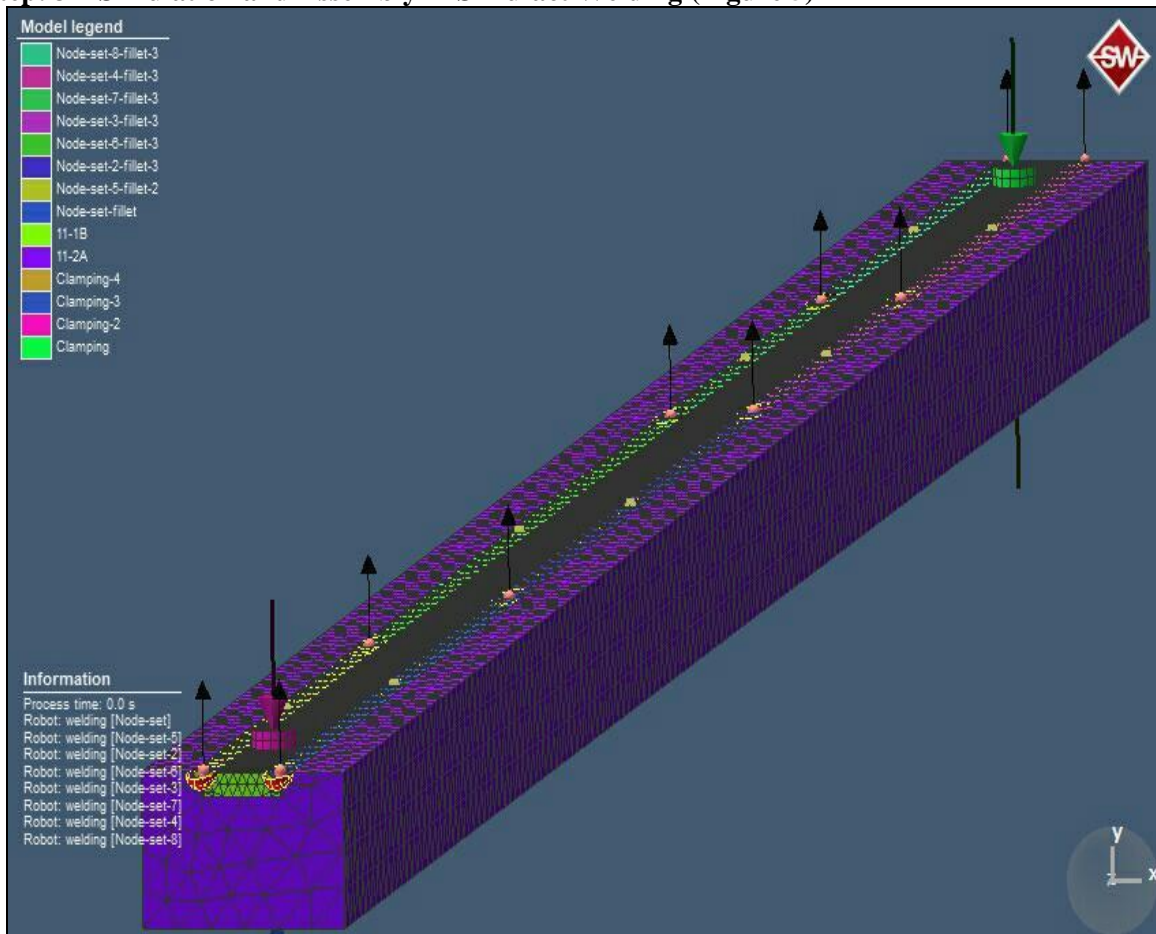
Assembling the Components and Setup in Simufact Welding.
